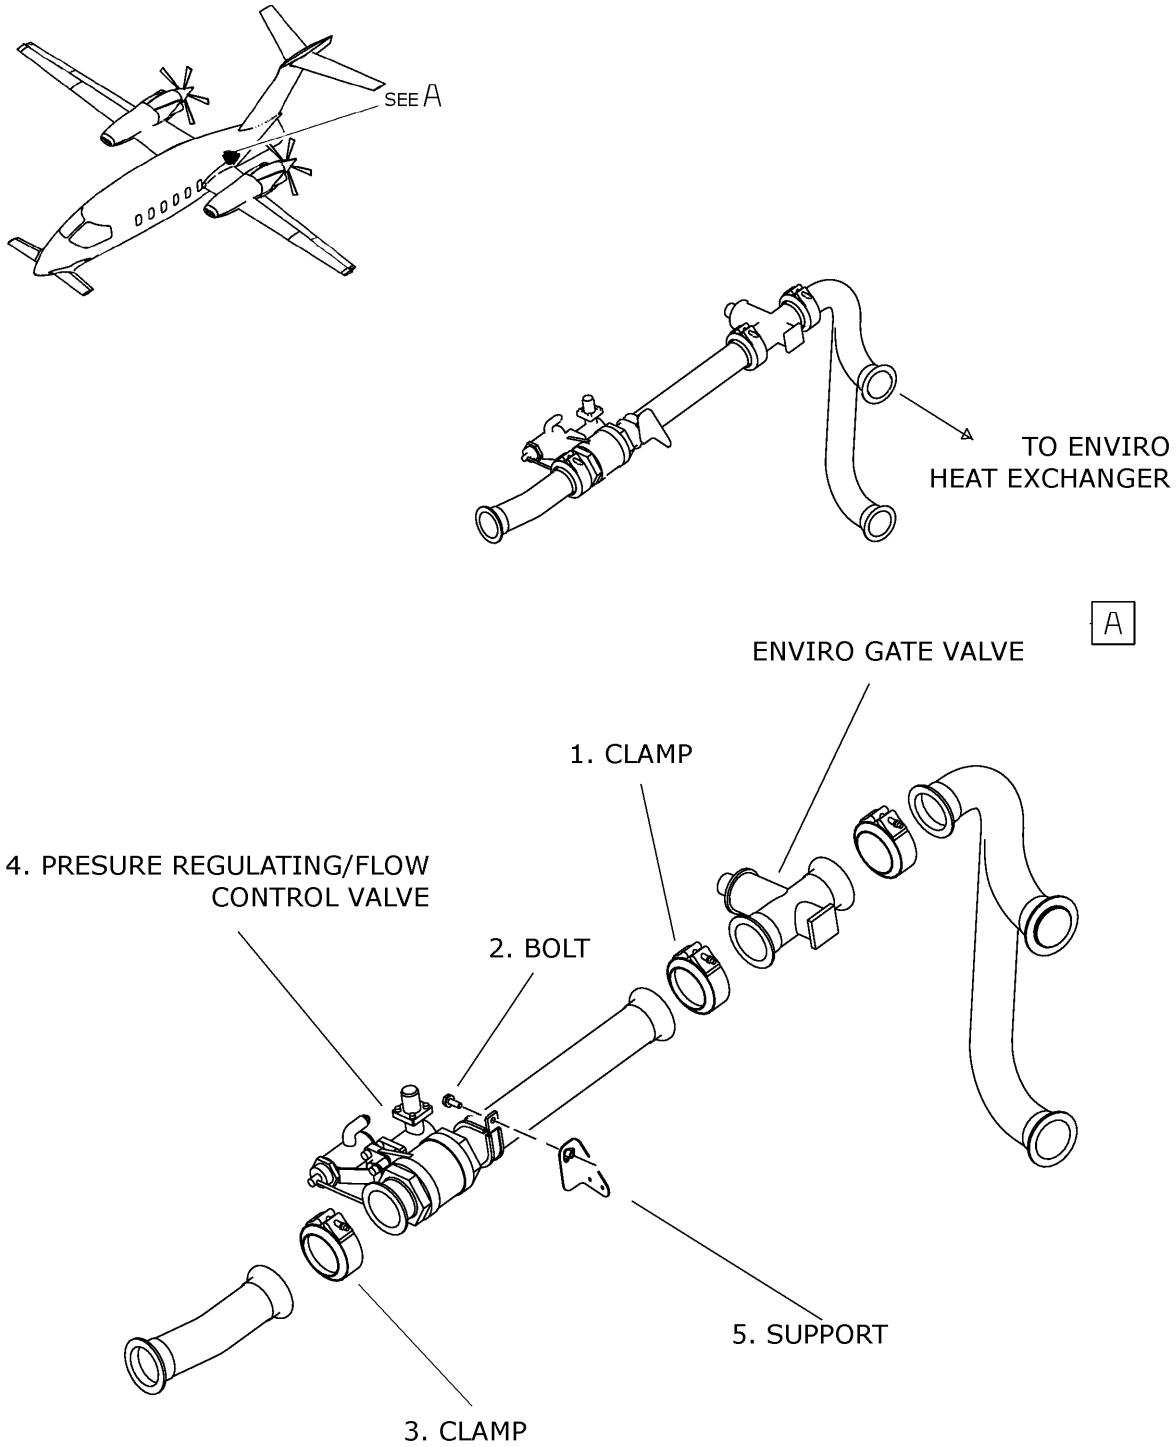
Pressure Regulating/Flow Control Valve (Third Evaporator installed) - Removal / Installation
